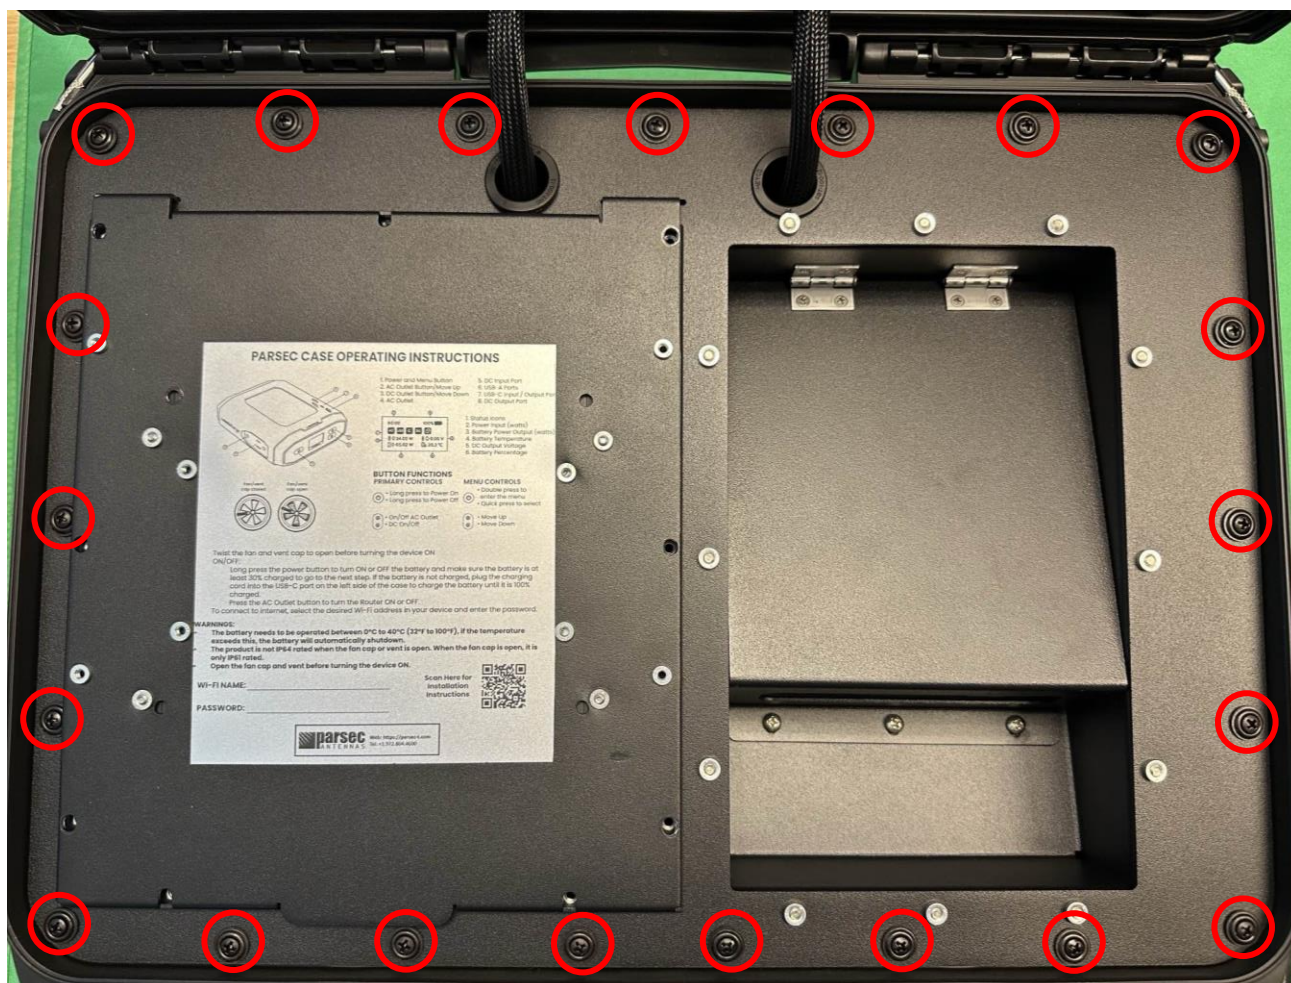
Fasten the cover plate to the case using PTA0351 screws.
